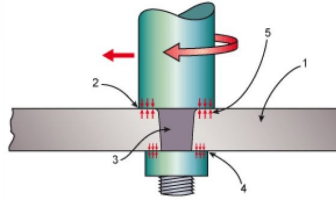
Bobbin Friction Stir Welding (BFSW) tool [23] 1 workpiece, 2 top shoulder, 3 probe(pin), 4 bottom shoulder, 5 reactive forces
